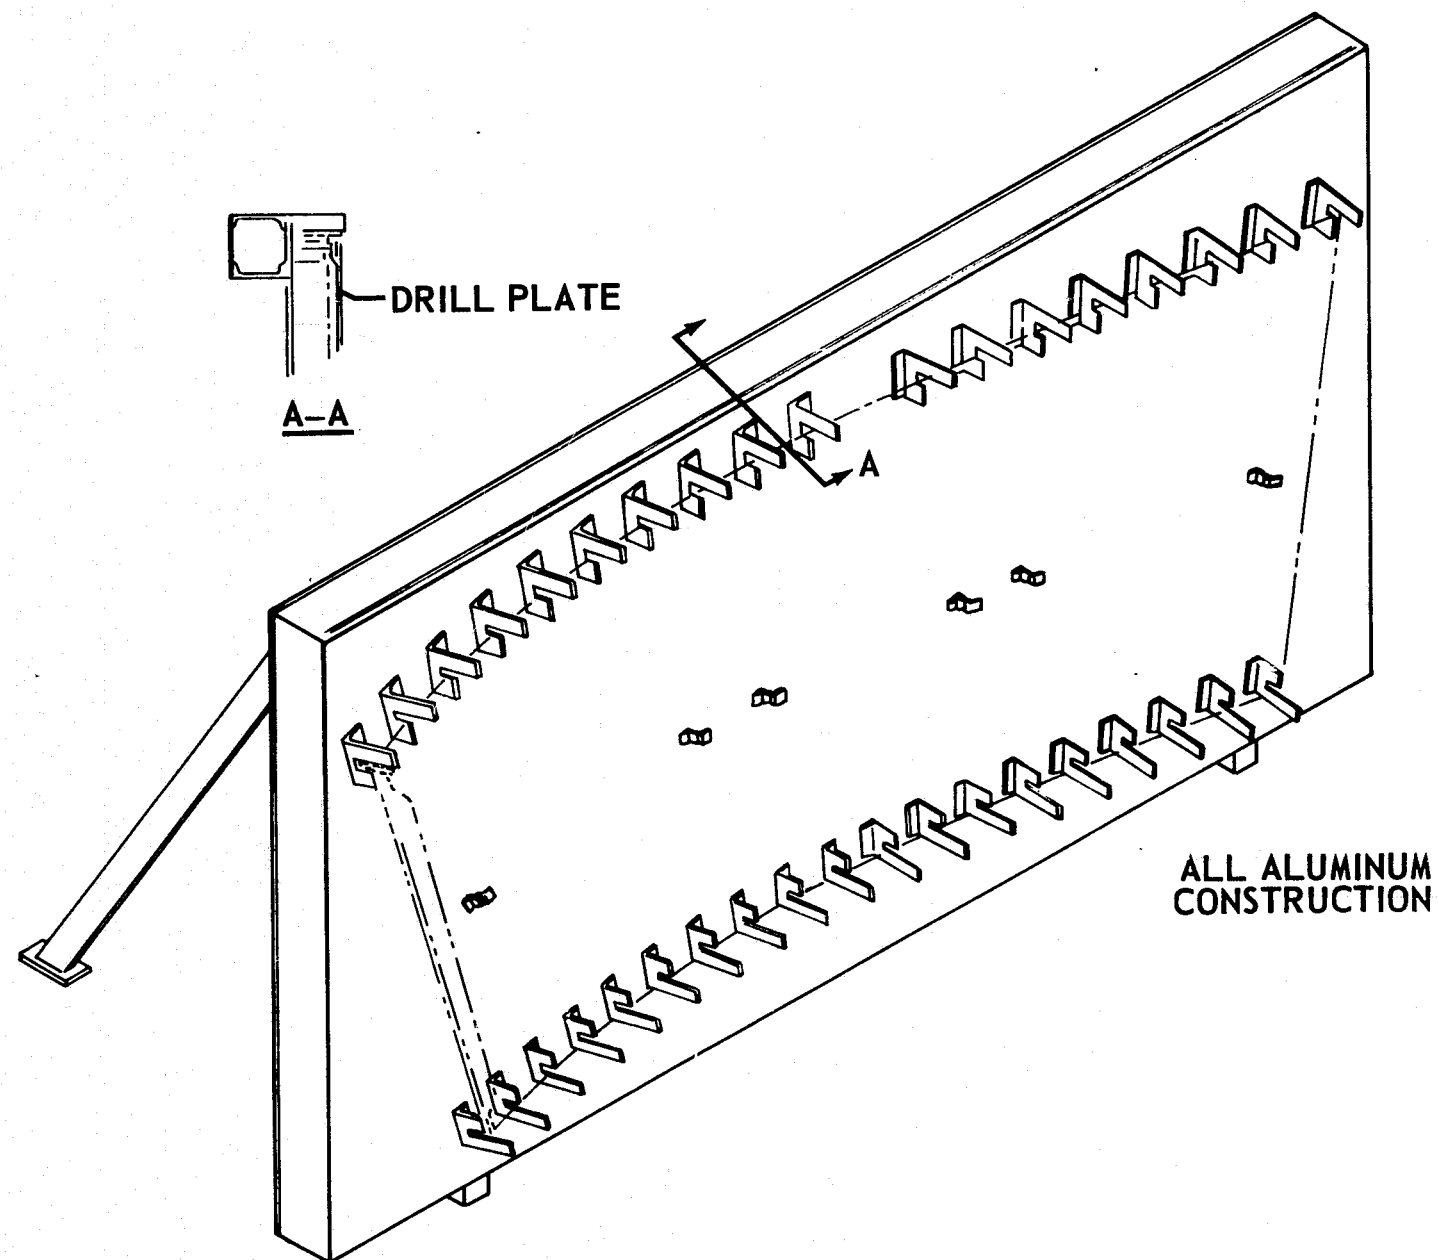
DEEP RING SEGMENT SUBASSEMBLY FIXTURE
